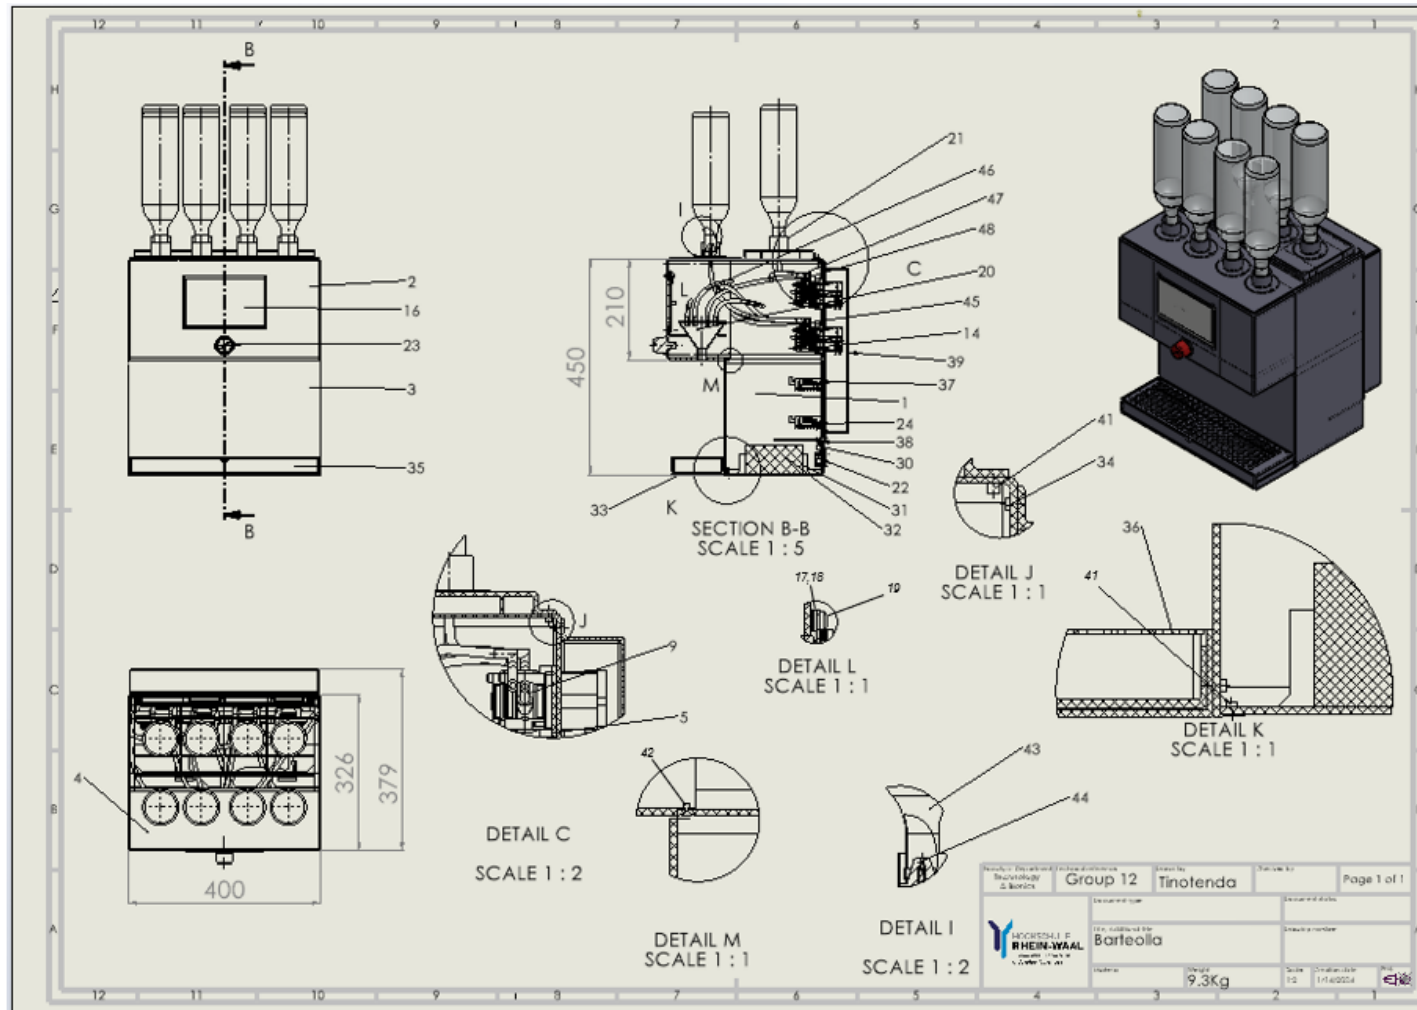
Technical Drawing for the cocktail mixer assembly.
